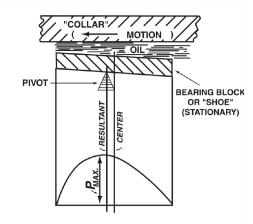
Illustration from a page of Albert Kingsbury's paper "Development of the Kingsbury Thrust Bearing"
